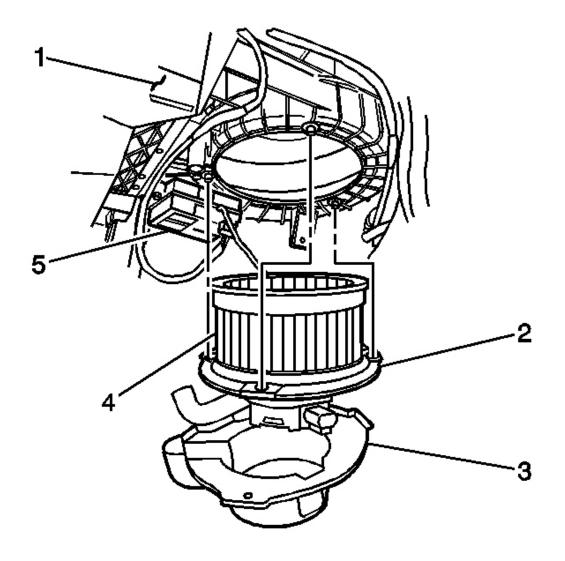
View Of Blower Motor Components Courtesy of GENERAL MOTORS CORP.
